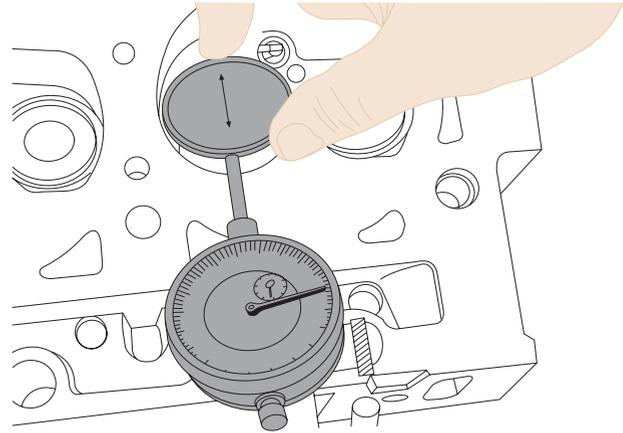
Using a dial gauge to measure valve guide and stem wear
